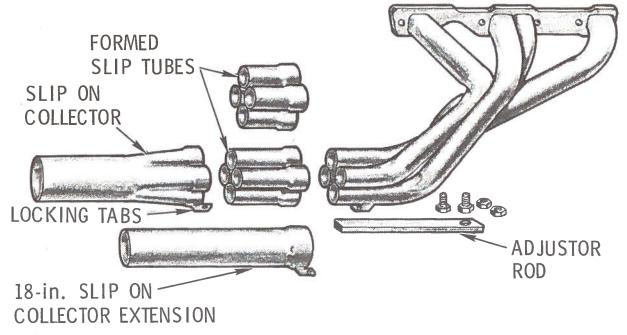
Hooker Adjustable Header Kit (Ref. 10-7)
